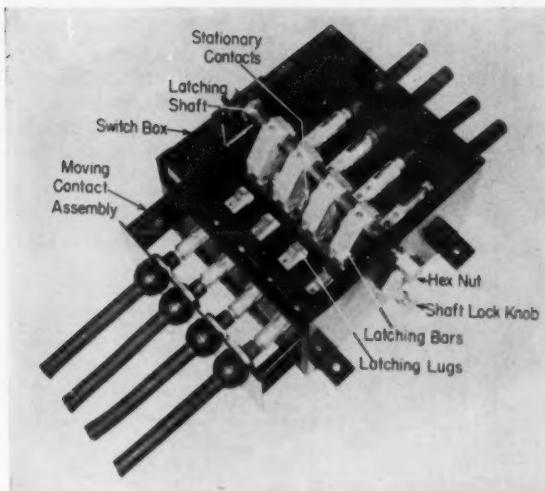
(above)—Motor lead assembly inserted preparatory to latching.
